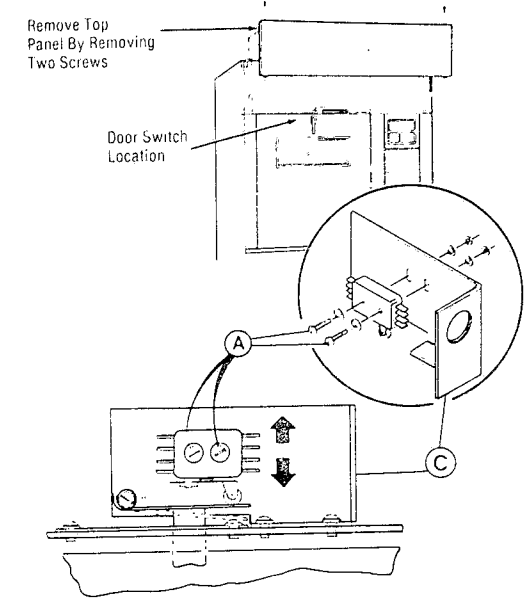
HINGED DOOR SWITCH ADJUSTMENT.
